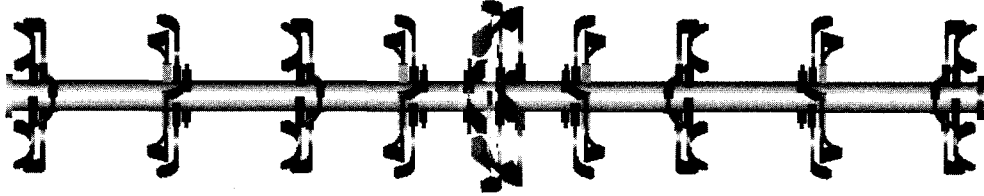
Rotary blade assembly of strip tillage dry paddy seeder.
